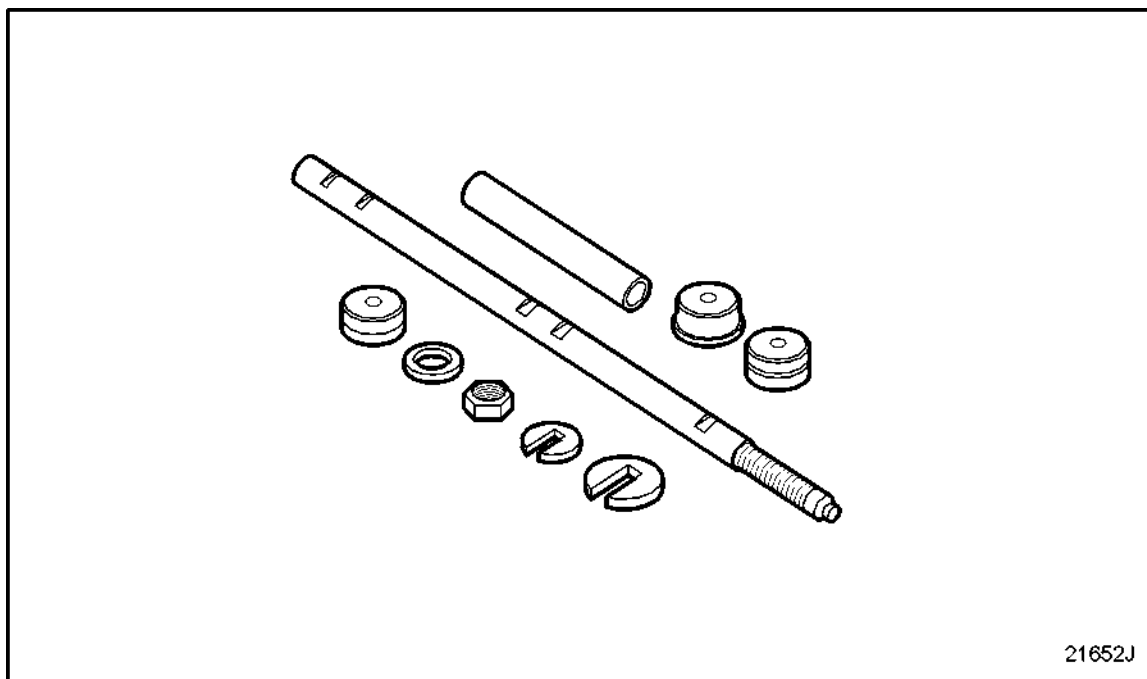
Balance Shaft Bushing Inst & Remvr,J 39819
